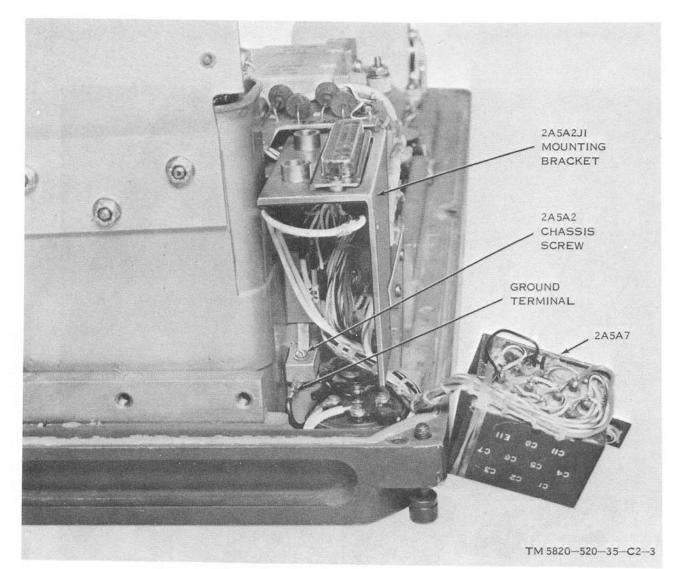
Amplifier, Radio Frequency AM-3349/GRC-106, front panel assembly 2A5 with dc-to-dc converter assembly 2A5A2 removed.
